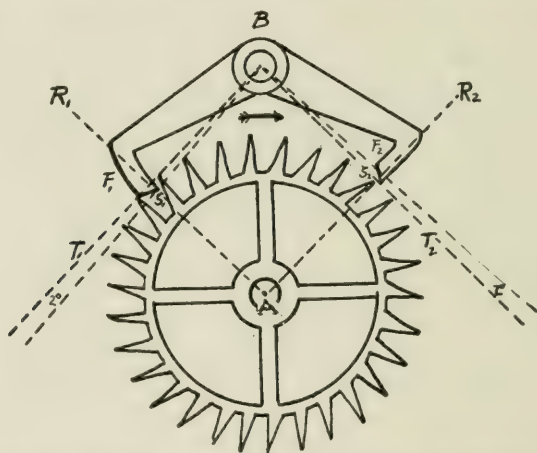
LAYING OUT A DEAD-BEAT ANCHOR ESCAPEMENT.
